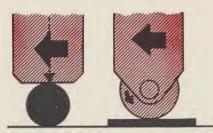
Rolling is preferred marking method. (Left) Circular workpiece rolls against flat tool; (right) circular tool rolls against flat workpiece.
